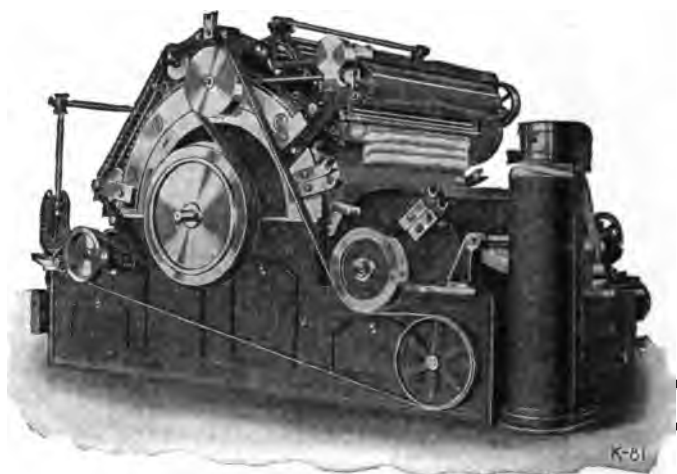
SEC. 10rr.—Cotton card, equipped with ball bearings, on main cylinder, doffer and locker in.
